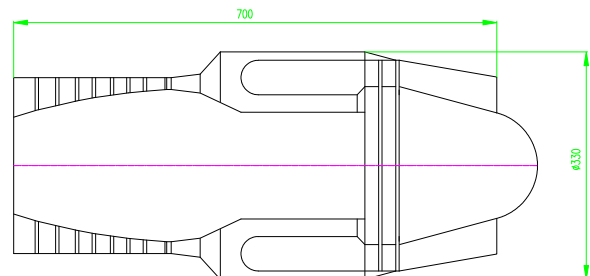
First engine layout after 2D calculations of compressor, combustor and turbine
